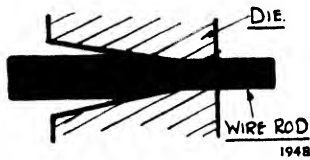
EXAGGERATED VIEW OF DRAWING DIE
